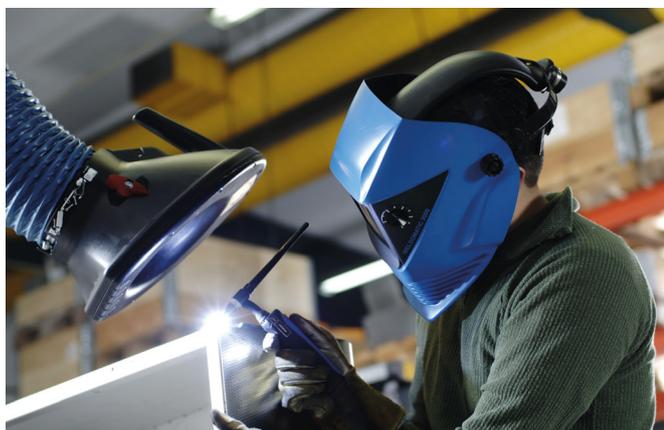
Preferred welding smoke extraction: Nederman's extraction arm to extract the harmful welding fumes at the source
